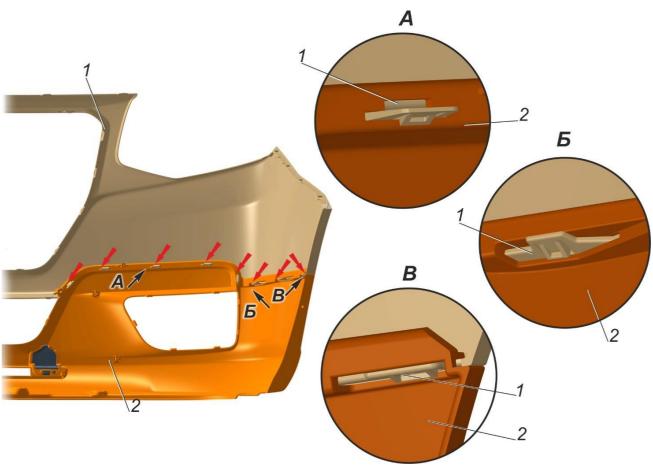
Fasteners securing radiator grille molding to radiator grille: 1 – radiator grille; 2 – radiator grille molding
